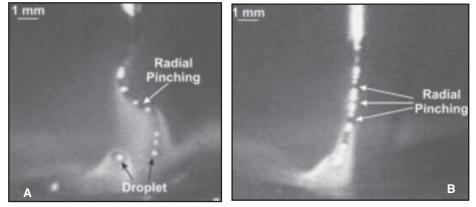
The LaserStrobe<sup>m</sup> video images showing the effect of radial pinch instability on the molten filler metal string during GMA welding of steel using argon shielding gas and 11 kW welding power. Depending on the orientation, the molten filler metal string can be viewed as dark field in A or a bright field in B.
